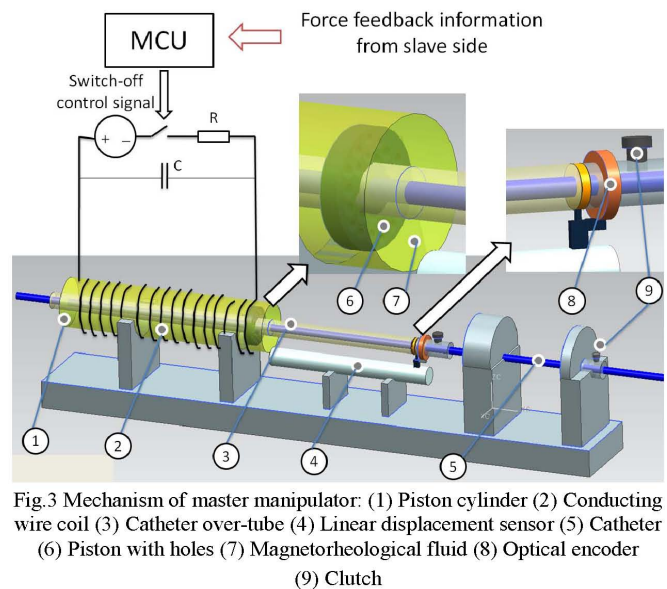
Mechanism of master manipulator: (1) Piston cylinder (2) Conducting wire coil (3) Catheter over-tube (4) Linear displacement sensor (5) Catheter (6) Piston with holes (7) Magnetorheological fluid (8) Optical encoder (9) Clutch
